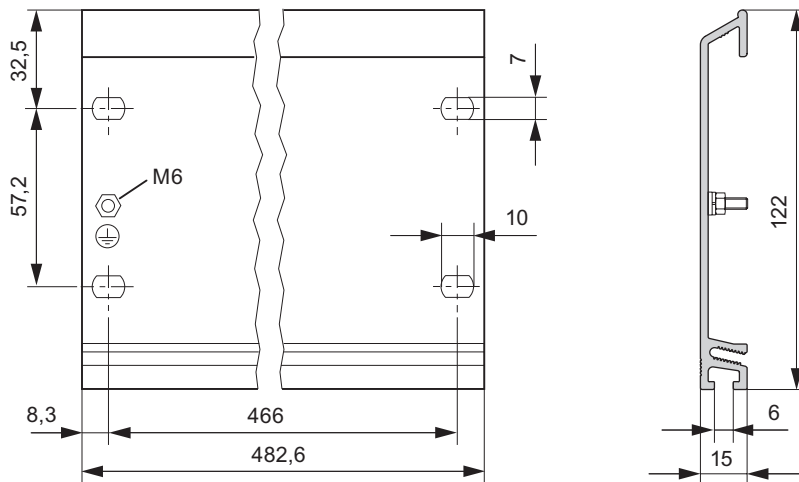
Dimensional drawing of the mounting rail with standard width of 482.6 mm.
